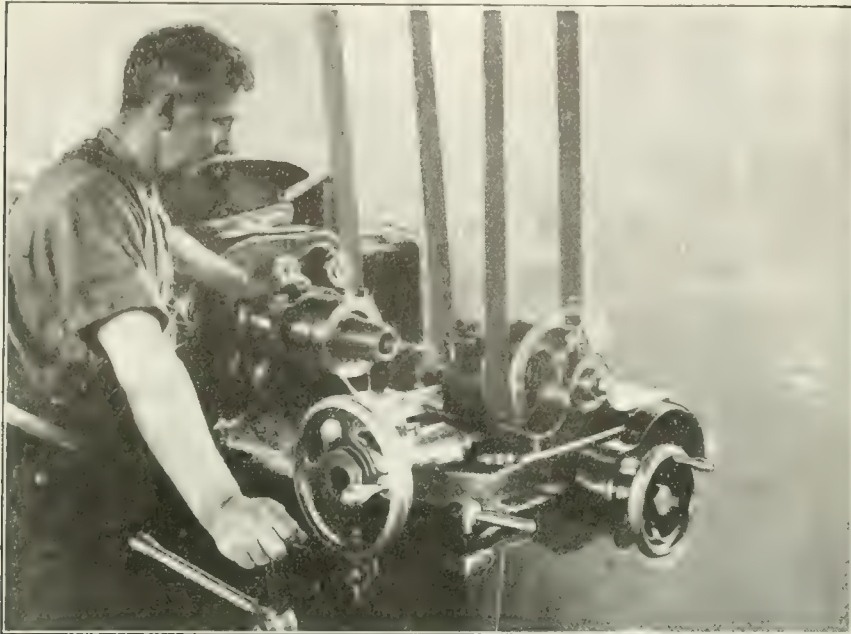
THREADING NOSE OF HIGH EXPLOSIVE AND SHRAPNEL SHELLS ON A "LEES-BRADNER" THREADING MACHINE.
